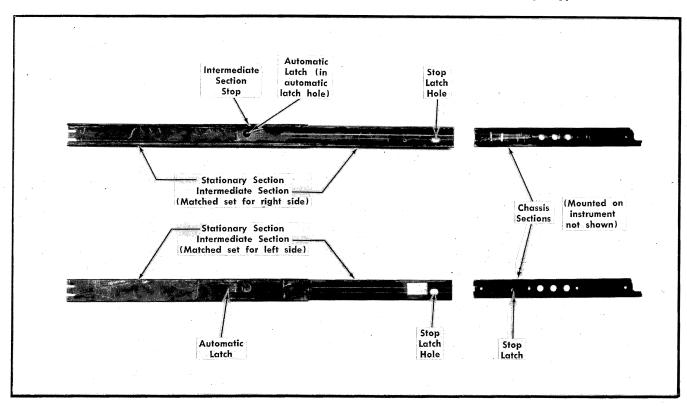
Illustrations showing the 1 3/4-inch wide slideout track assemblies.
